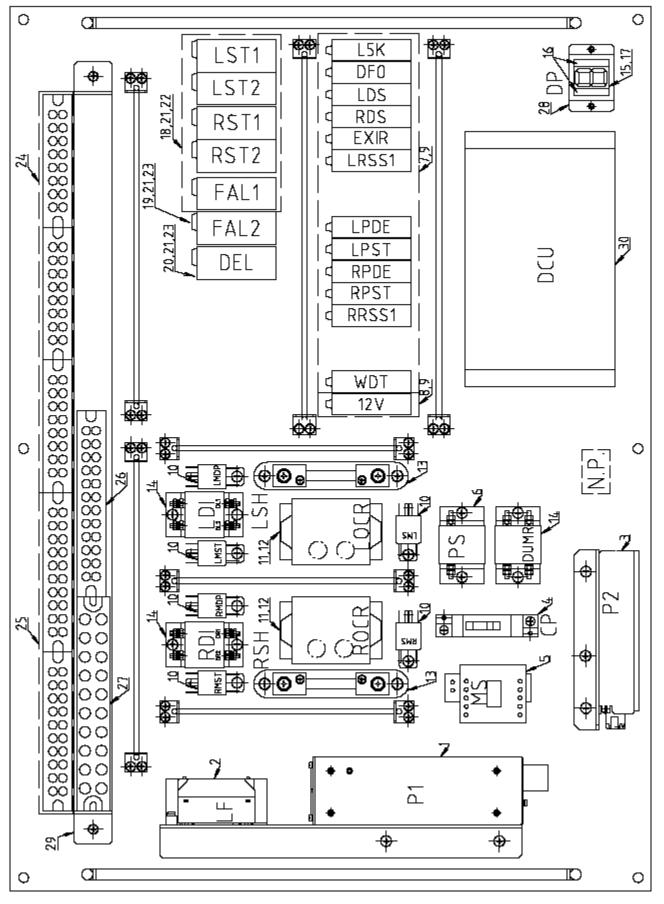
PF7000 SERIES CONTOLLER P/N 38150 (SHEET 1 OF 2)
